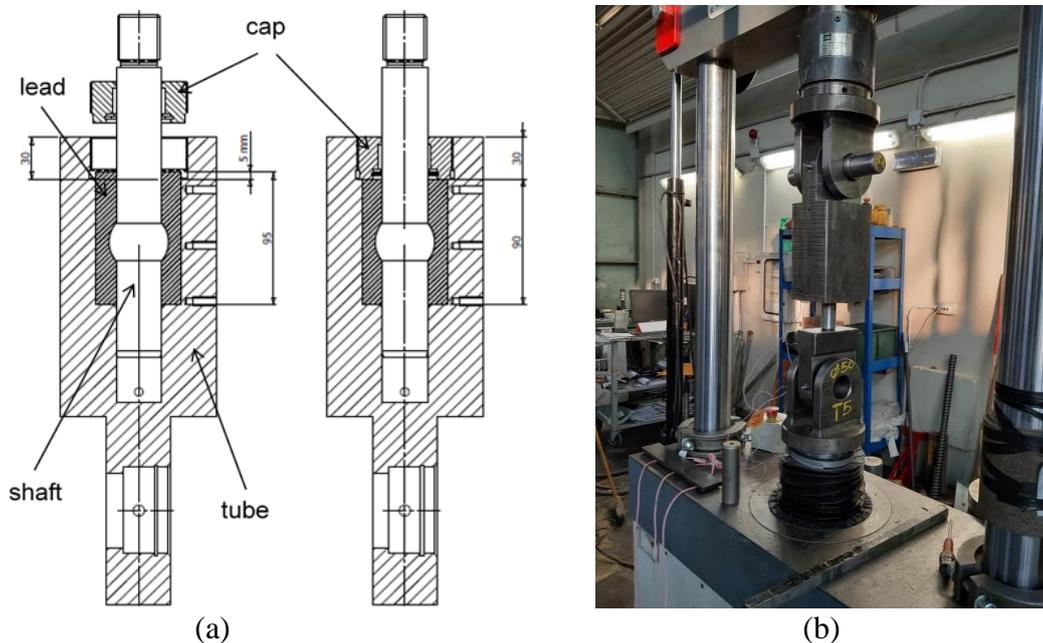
(a) Assembly of the bulged-shaft LED; (b) specimen on the testing machine
